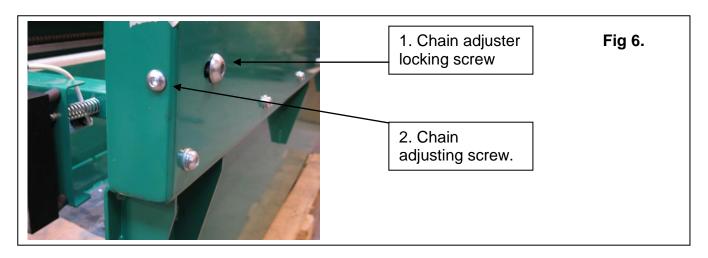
below shows the right hand adjusting points; it is the same for the left hand chain adjustment.
